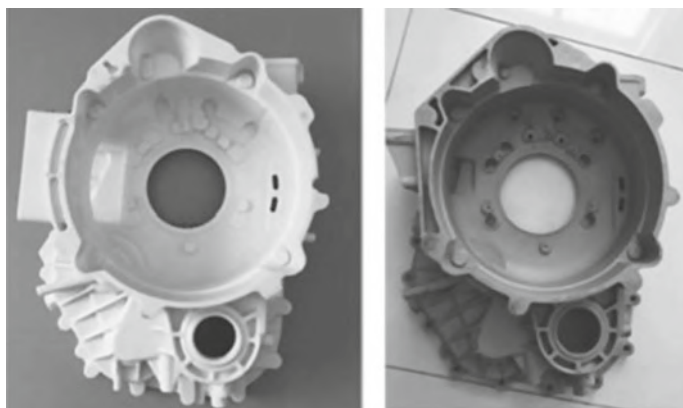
3D printed wax mold of clutch housing (left) and metal part obtained after precision casting (right)
